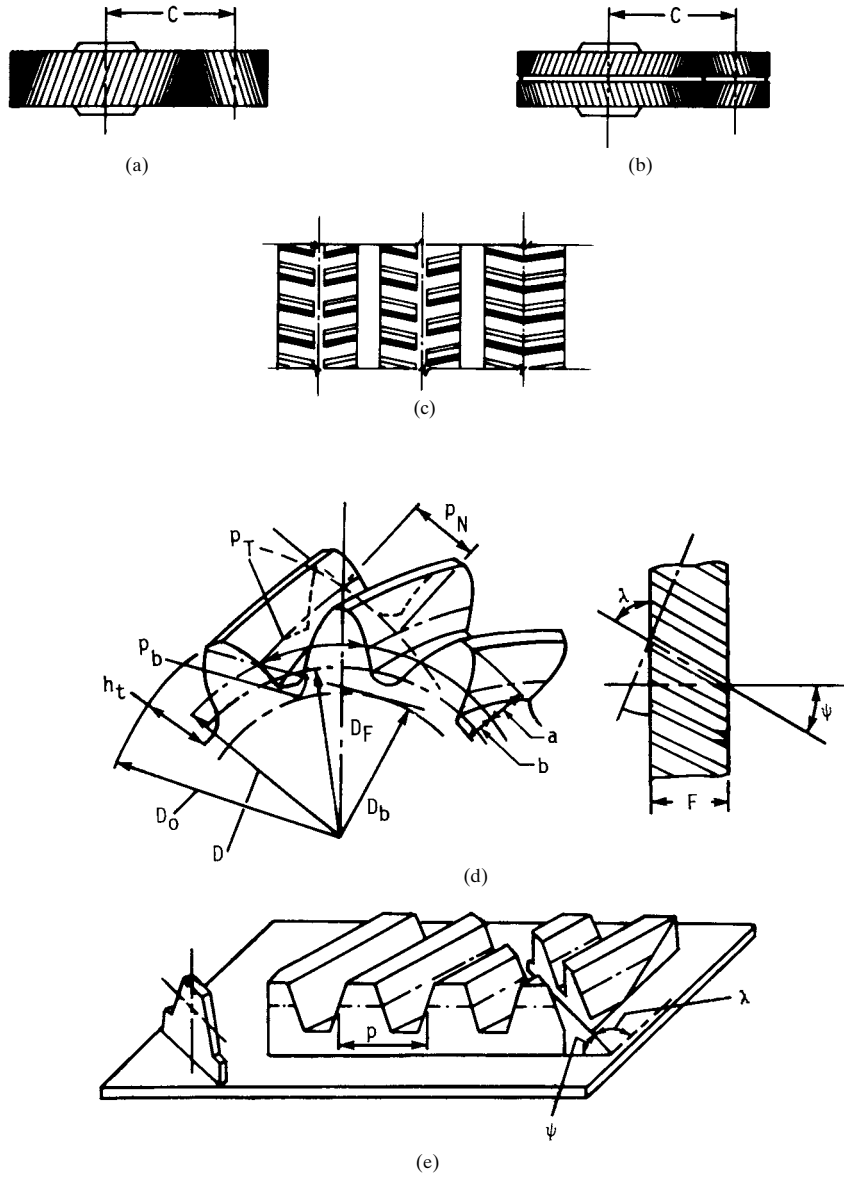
Terminology of helical gearing. (a) Single-helix gear. (b) Double-helix gear. (c) Types of double-helix gears: left, conventional; center, staggered; right, continuous or herringbone. (d) Geometry. (e) Helical rack.
